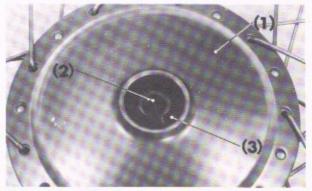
(1) Front wheel hub (2) Ball bearing
